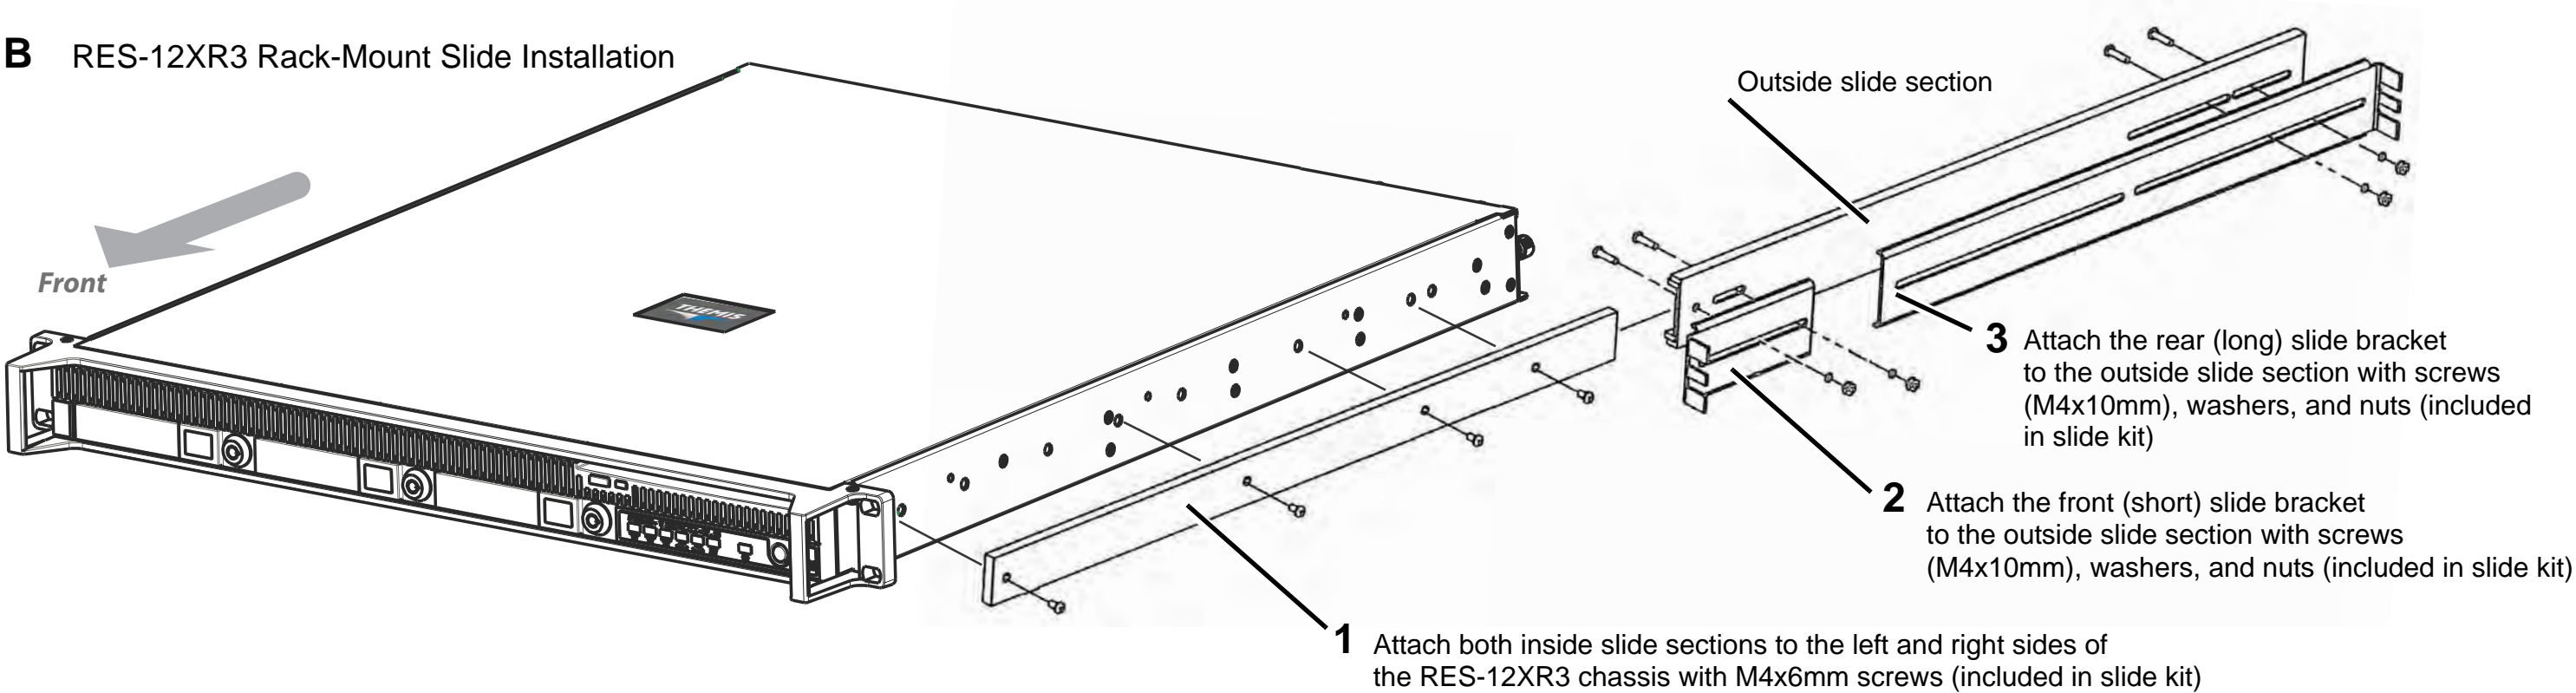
RES-12XR3 Rack-Mount Slide Installation
